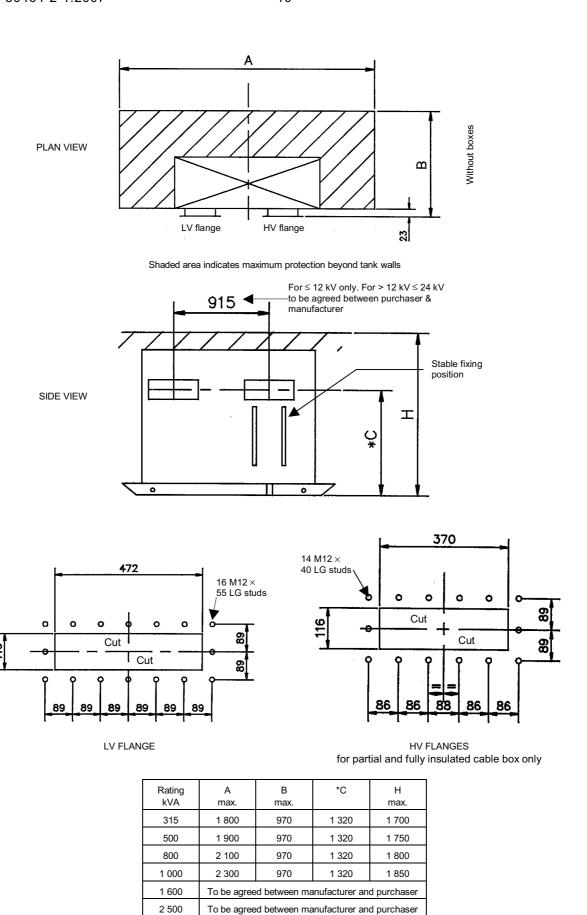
Transformer with cable boxes, Type 1 side mounted – Limiting dimensions
